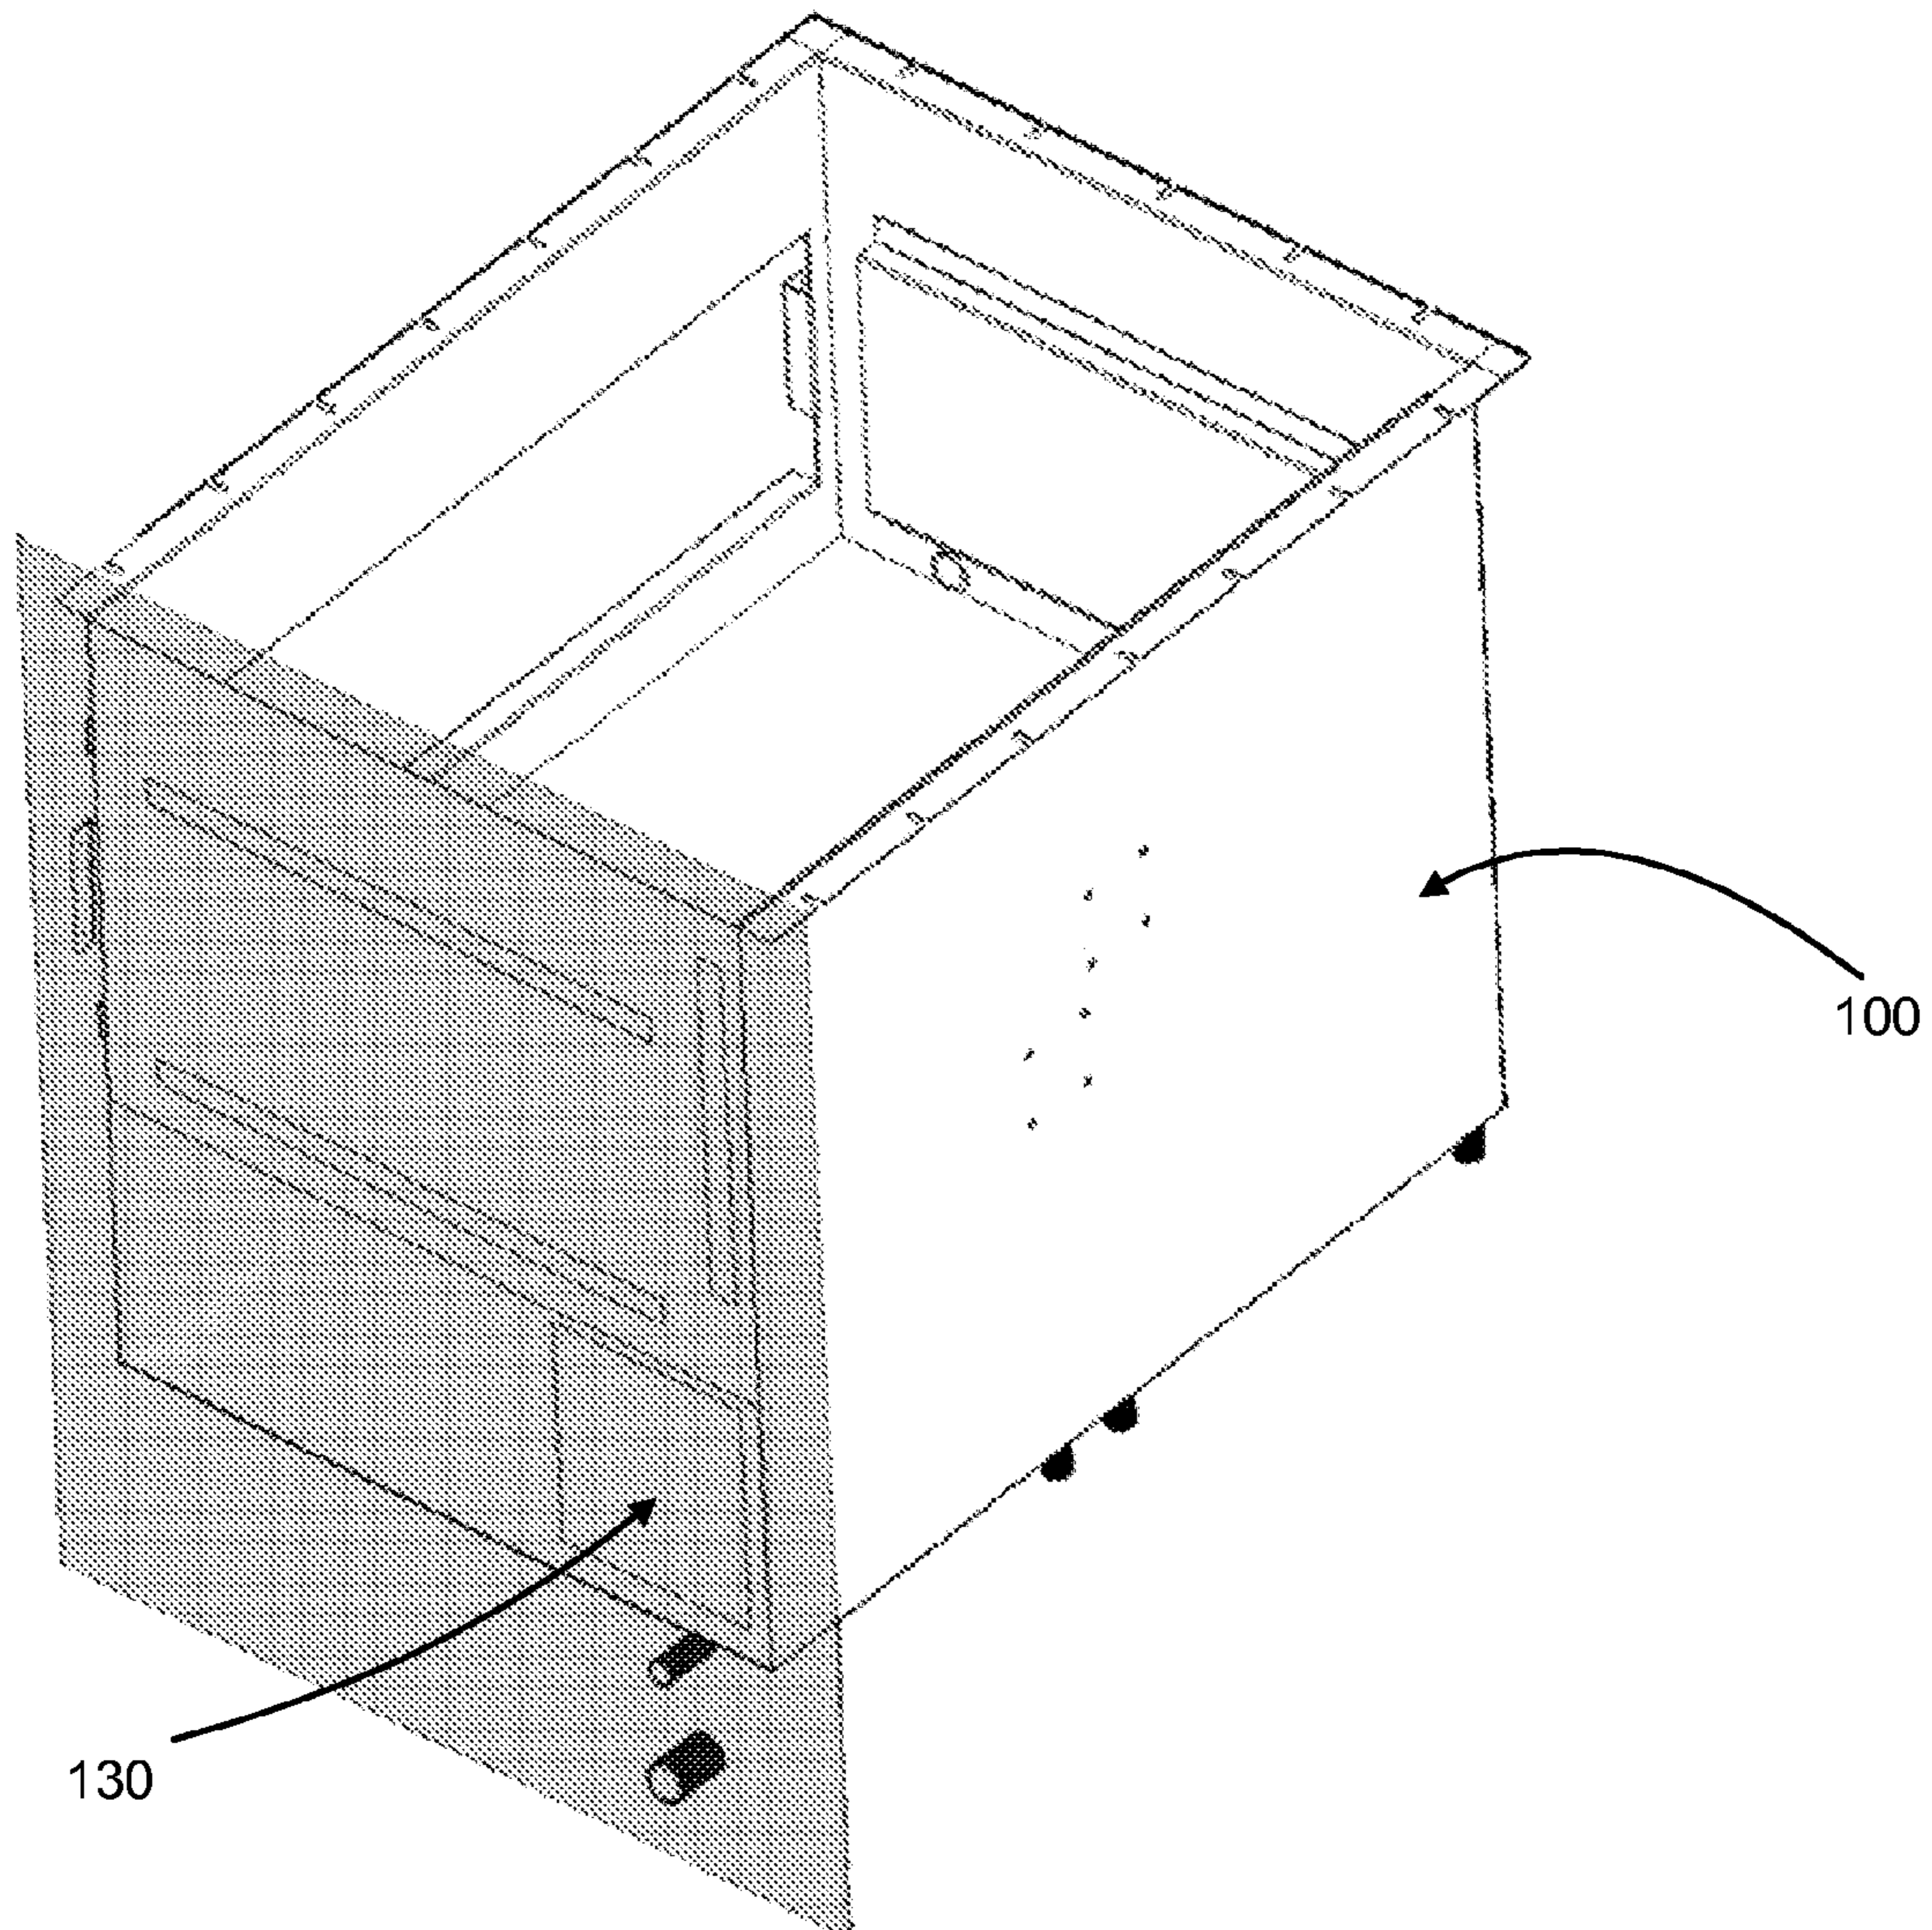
D Tank – Section Isometric View Illustrating Coolant Passage
